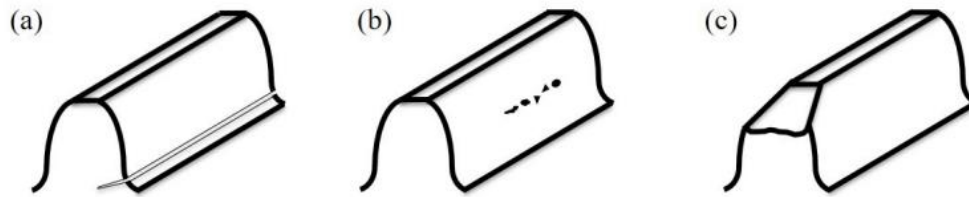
Gear tooth defects (a) tooth crack, (b) tooth pitting, (c) tooth chipping [13]
